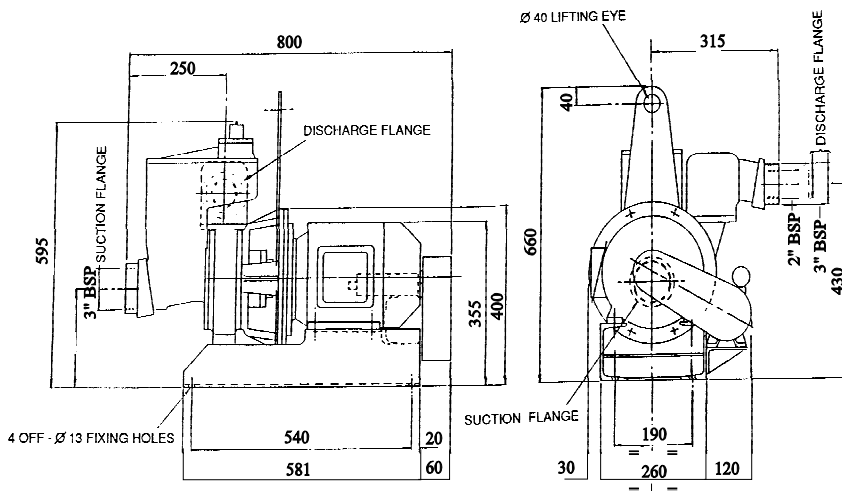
Overall Dimensions For Electric, Bed Plate Mounted Pumpset
